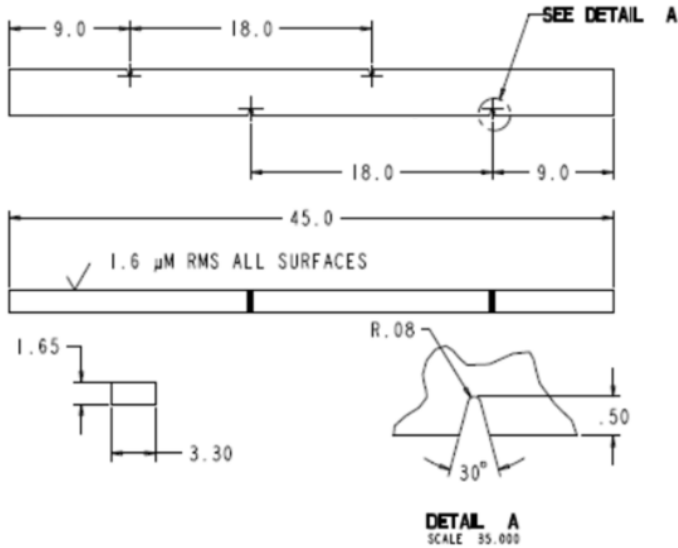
M4CVN specimen drawing. Unit in millimeter.
